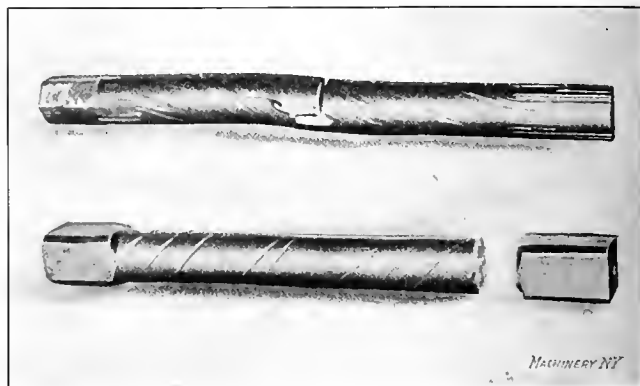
Condition of Shafts Broken in Tests shown in Fig. 17; the Gears were Uninjured
